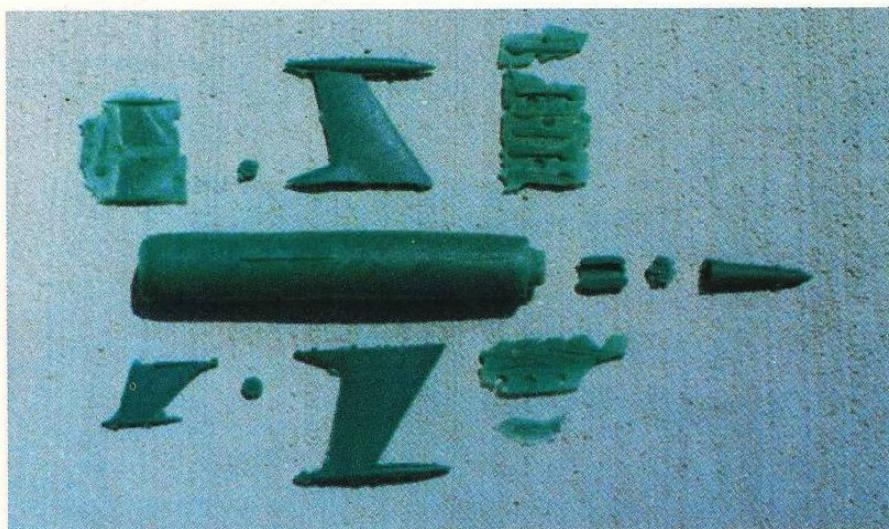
The parts are molded in a translucent green epoxy resin. Note all small parts are molded in a sheet of flash. Scott used a hot knife to cut the small parts out.
